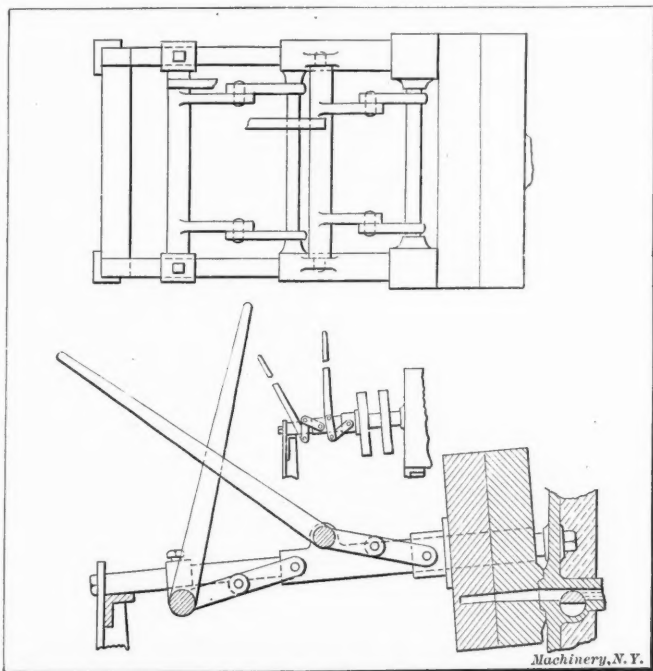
Toggle-joint Arrangement for Parting the Mold and Drawing it away from the Spout
